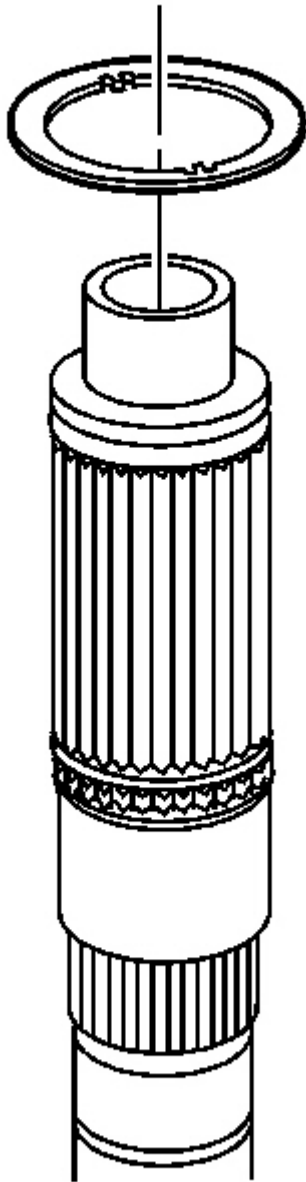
Positioning The Input Gear In The Planetary Gear Assembly
